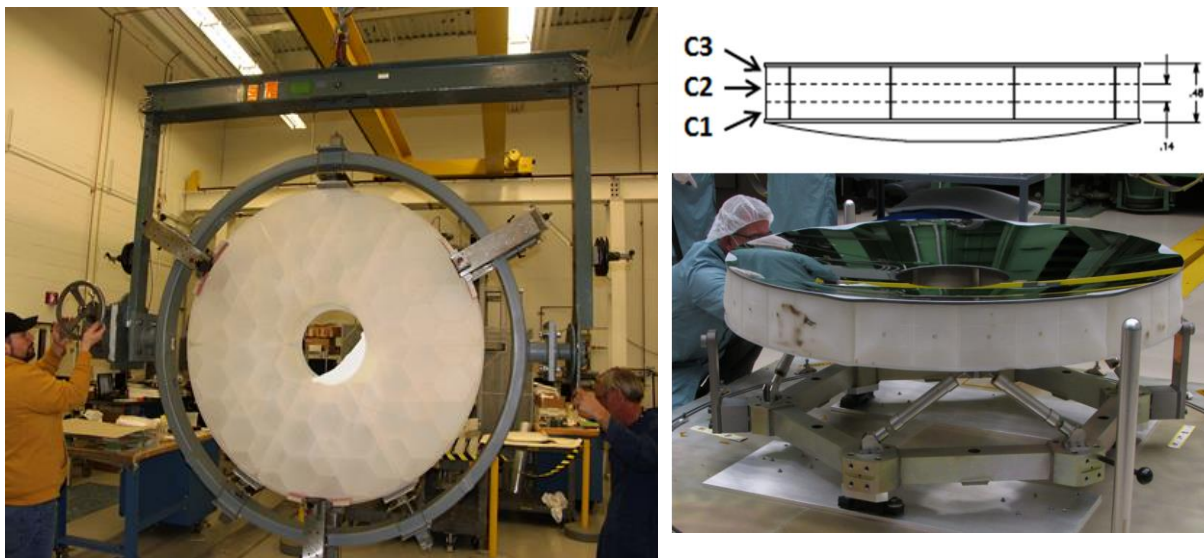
(left) Low-temperature-fused substrate; (top right) 5-layer design; (bottom right) completed mirror assembly.
